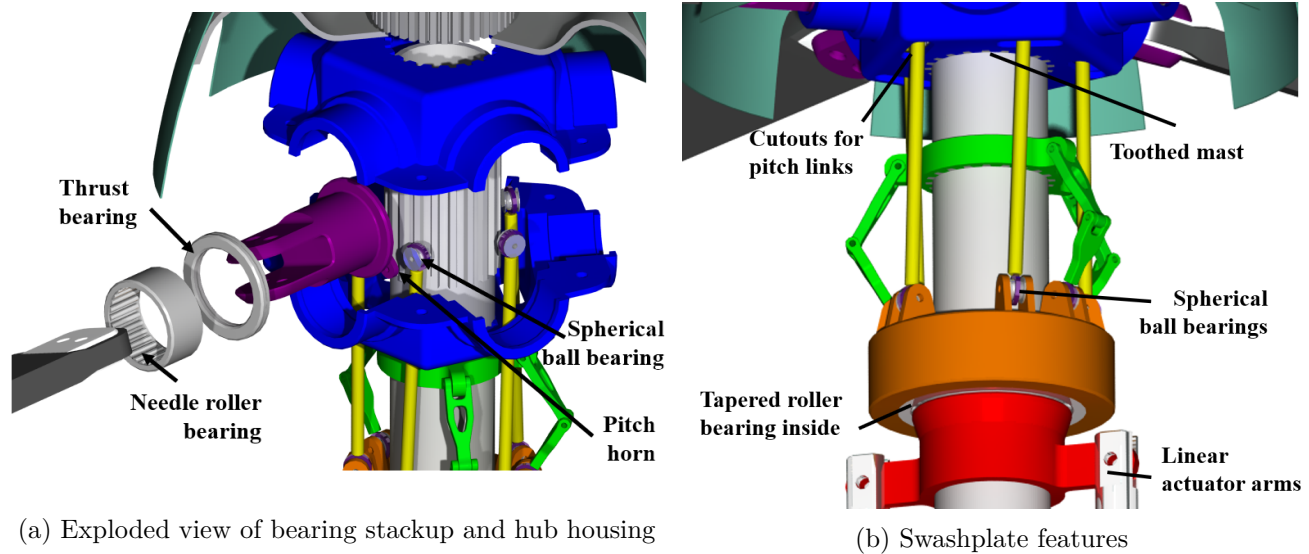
In-depth component details of the hub and swashplate assemblies
